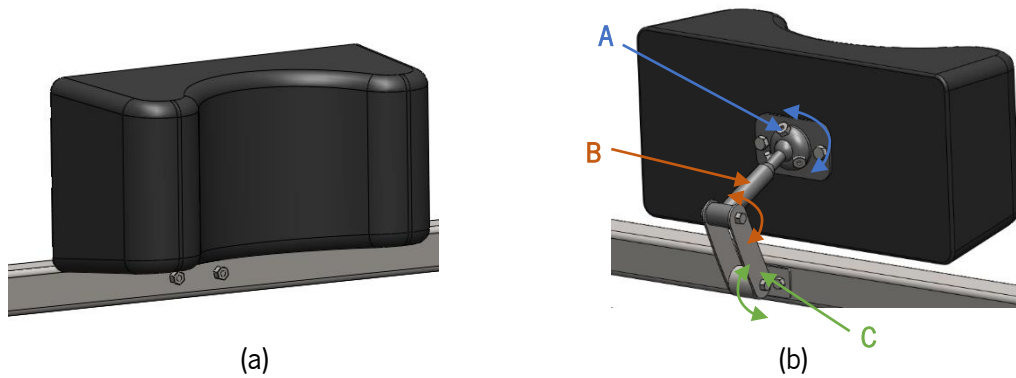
Headrest: (a) front view, (b) adjusting mechanism.
